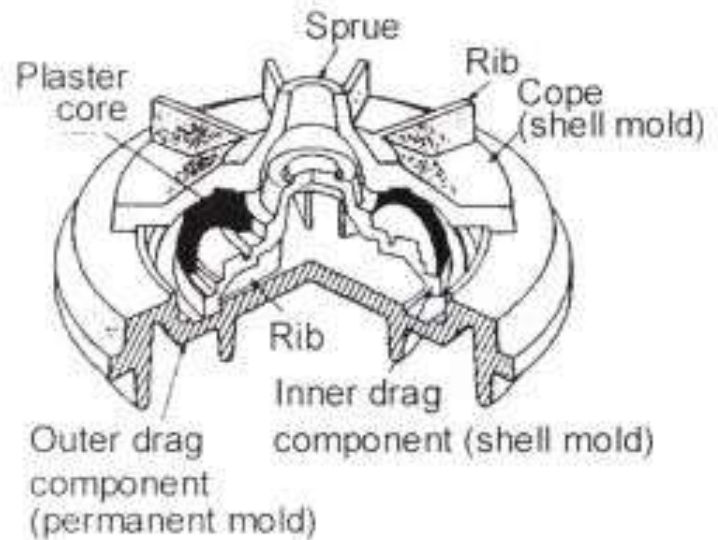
A composite mold used in casting an aluminum-alloy torque converter. This part was previously cast in an all-plaster mold
